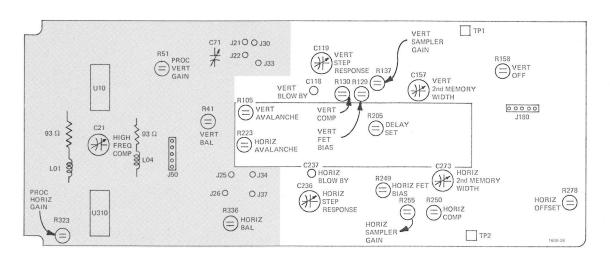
P7001 Sample & Hold card adjustments, test points, and connectors.
